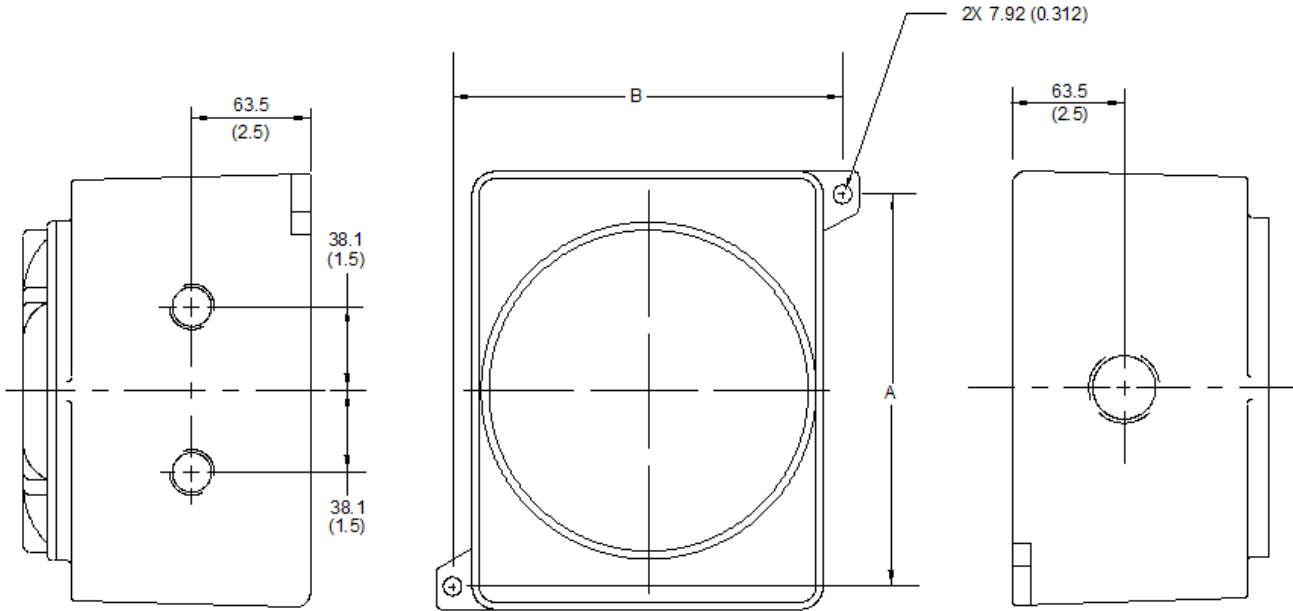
CA72341 2-Unit Explosion-Proof Housing Dimensions
